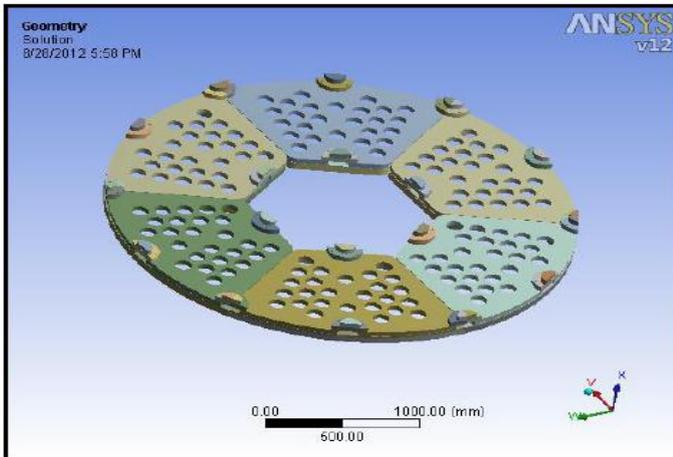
Imported model of Complete Filter sheet Plate Assembly from CATIA
